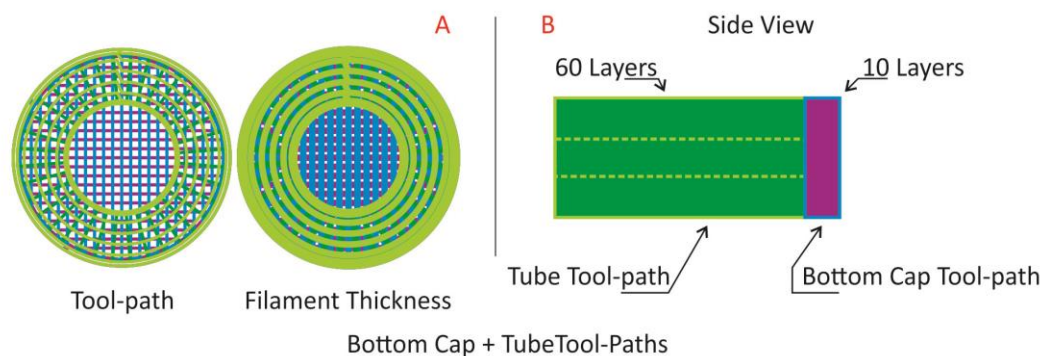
, Layer plan for jar build, both the tube and the bottom cap tool-paths combined. figure by author
